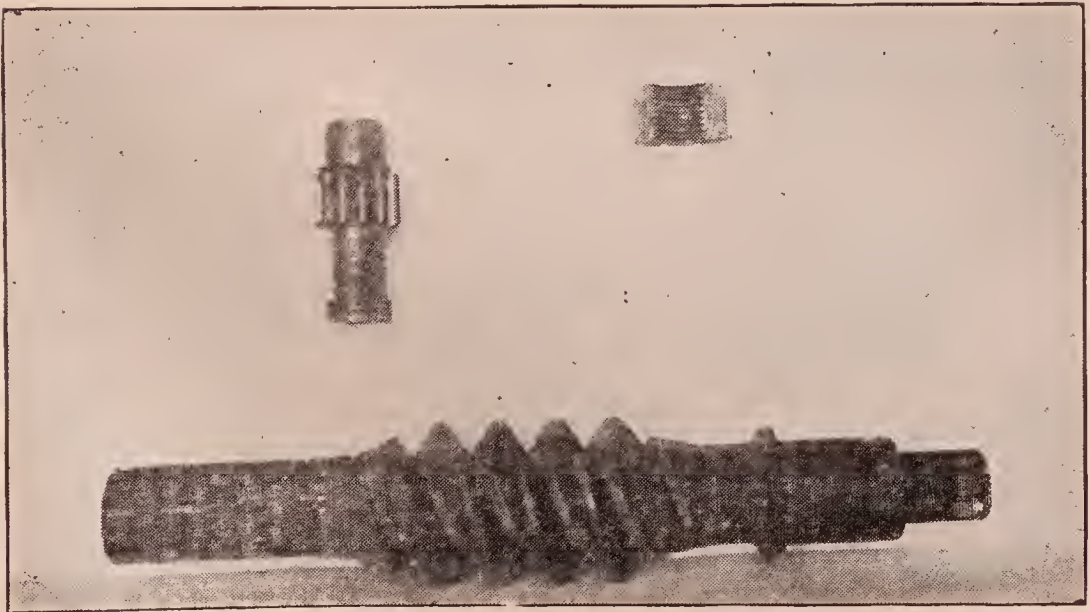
Drive shaft of a Fordson Tractor showing large threads.
